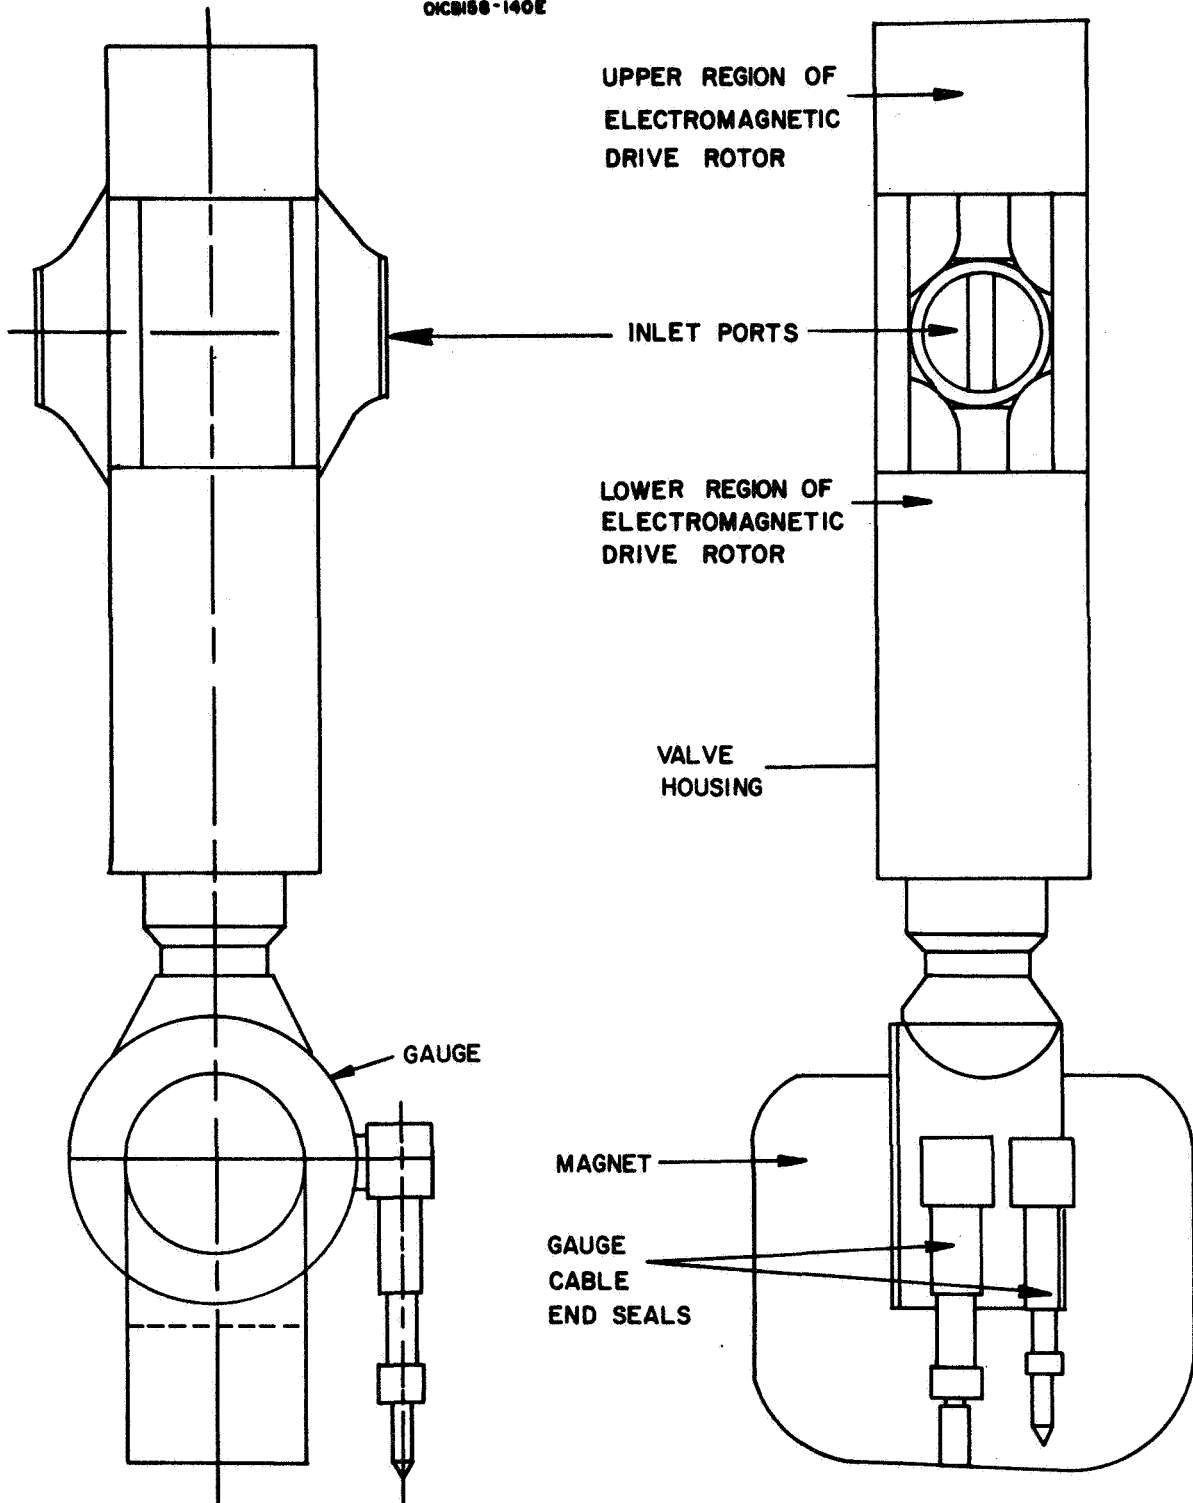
Flexure-pivot oscillating valve, gauge and magnet assembly.
